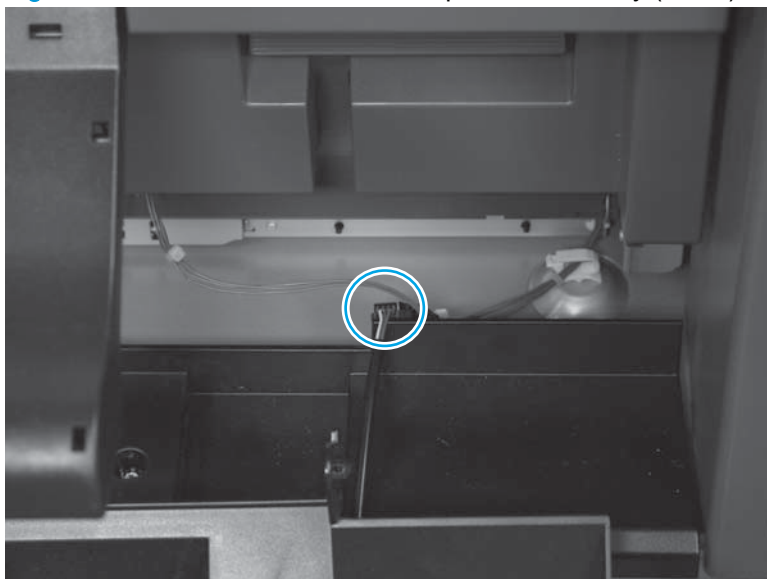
Remove the saddle output bin assembly (1 of 2)
